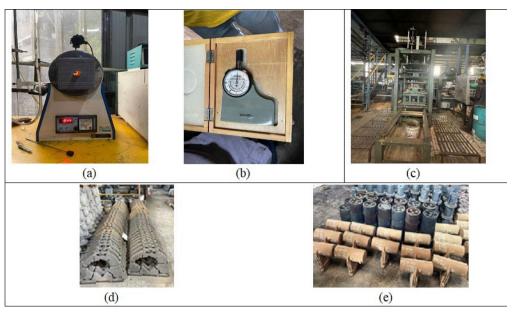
(a) Gas evolution tester machine, (b) Scratch hardness tester device, (c) Cold box Core shooter machine, (d) 8 kg cold box cores, (e) 15kgs cold box cores
